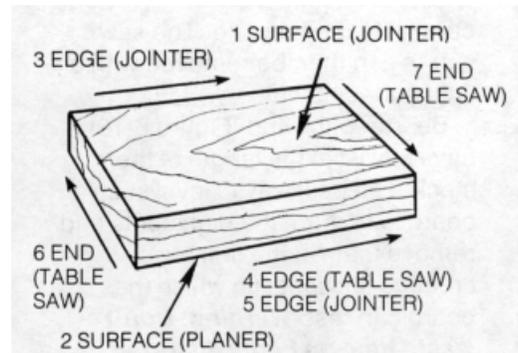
The seven steps and machines used to square up the six surfaces of a piece of stock.
